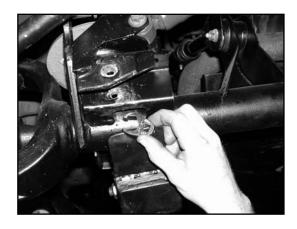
INSERT CROWFOOT WRENCH INTO OPENING TO TIGHTEN NUT
